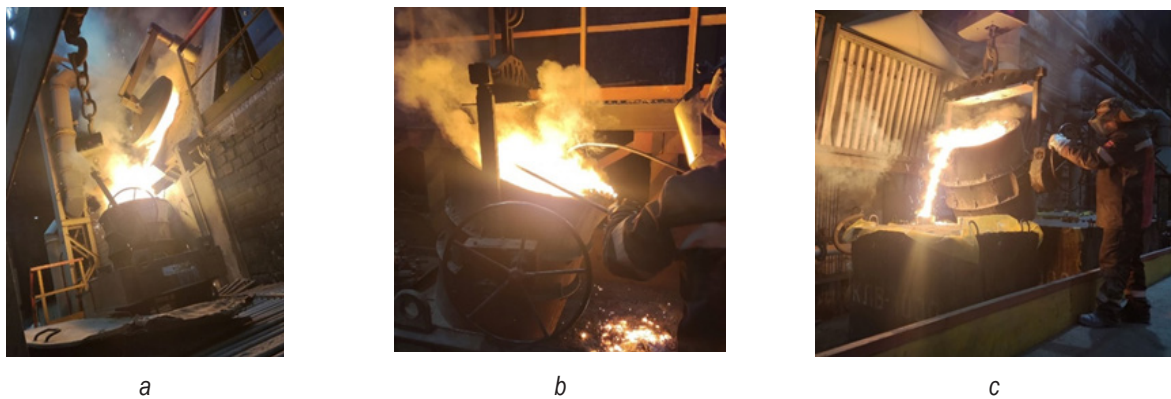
The casting process at the 3-ton induction steel melting furnace (manufactured by EGES, Turkey): (a) discharge from the furnace into a ladle; (b) slag removal from the metal mirror; (c) casting process into moulds
